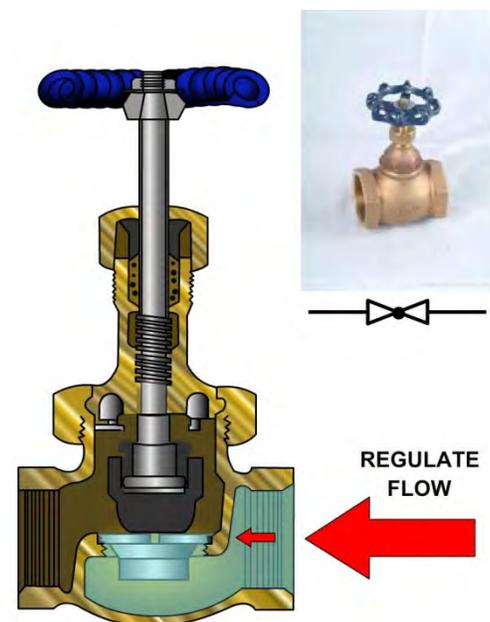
Cutaway view of a straight-flow globe valve.
